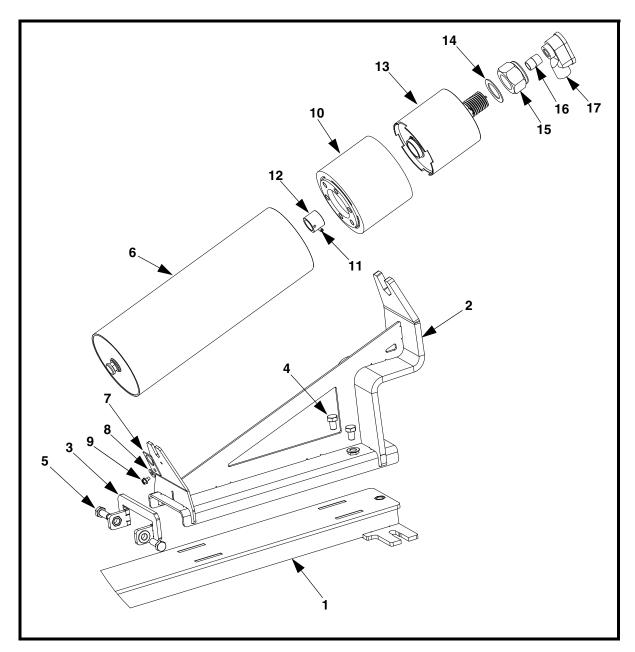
Martin® Roll Generator Assembly, P/N RGTMIEXP-XXXX1XX
